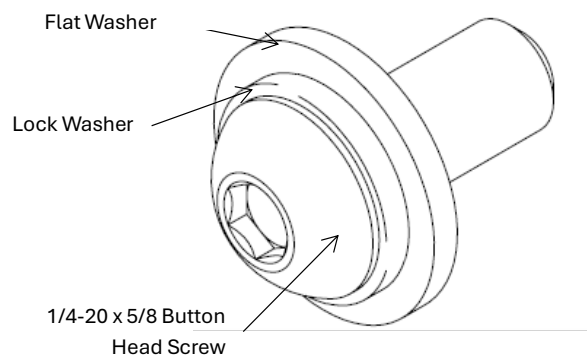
Control Unit Mounting Hardware Sequence
